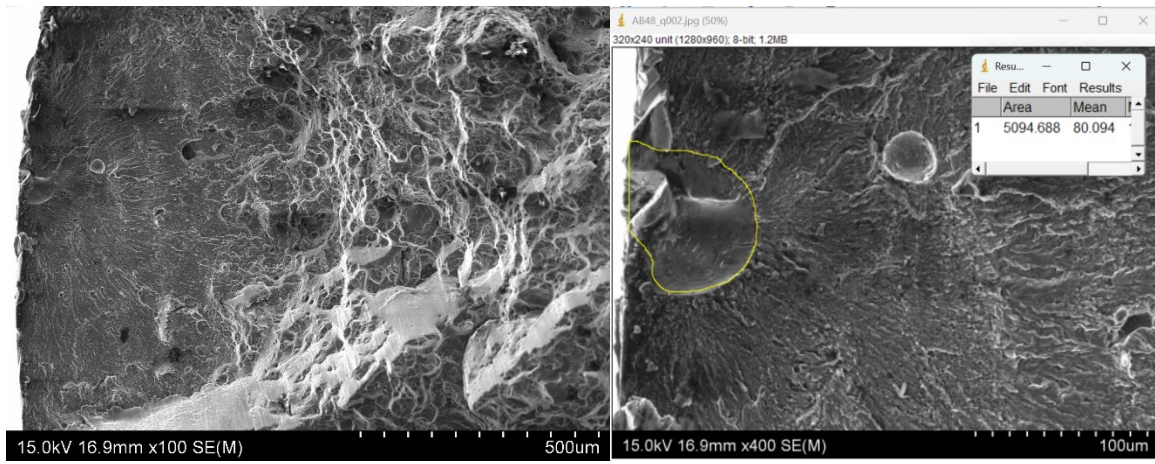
Fracture surface of sample CD//BD-HT-6 a) x50, b) x400.
